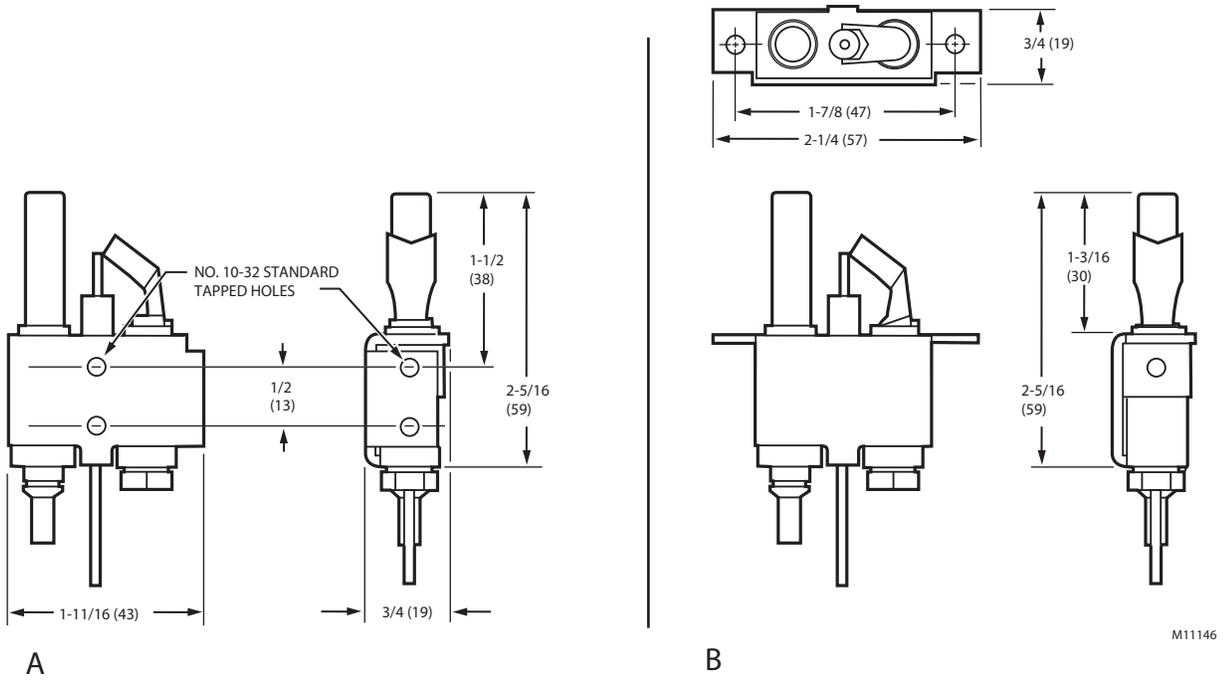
Q377 mounting brackets and dimensions in in. (mm)
